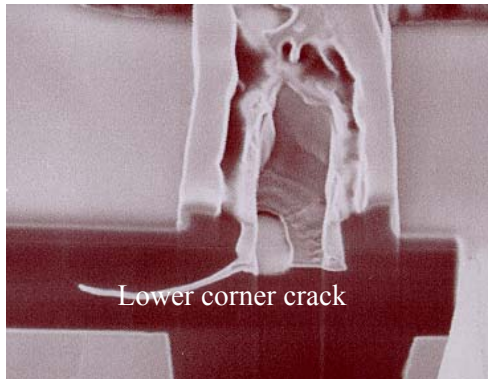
An FIB cross-sectional image of a failed laser metal cut site due to undesirable lower corner cracking.
